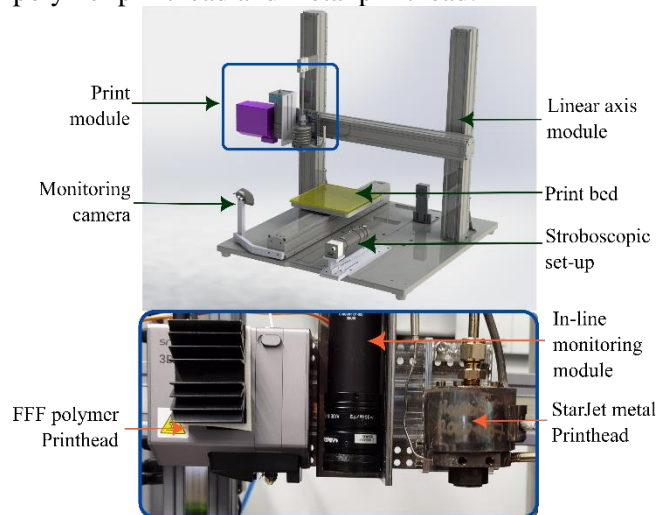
A) Schematic of our hybrid printing platform and B) Photo of the print module containing the two printheads.
